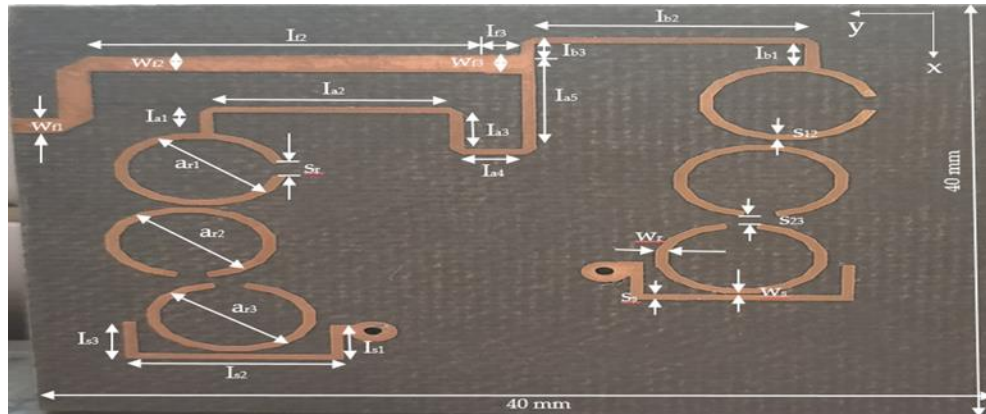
Top View of Strip-Line BPF Layer with Dimensions
